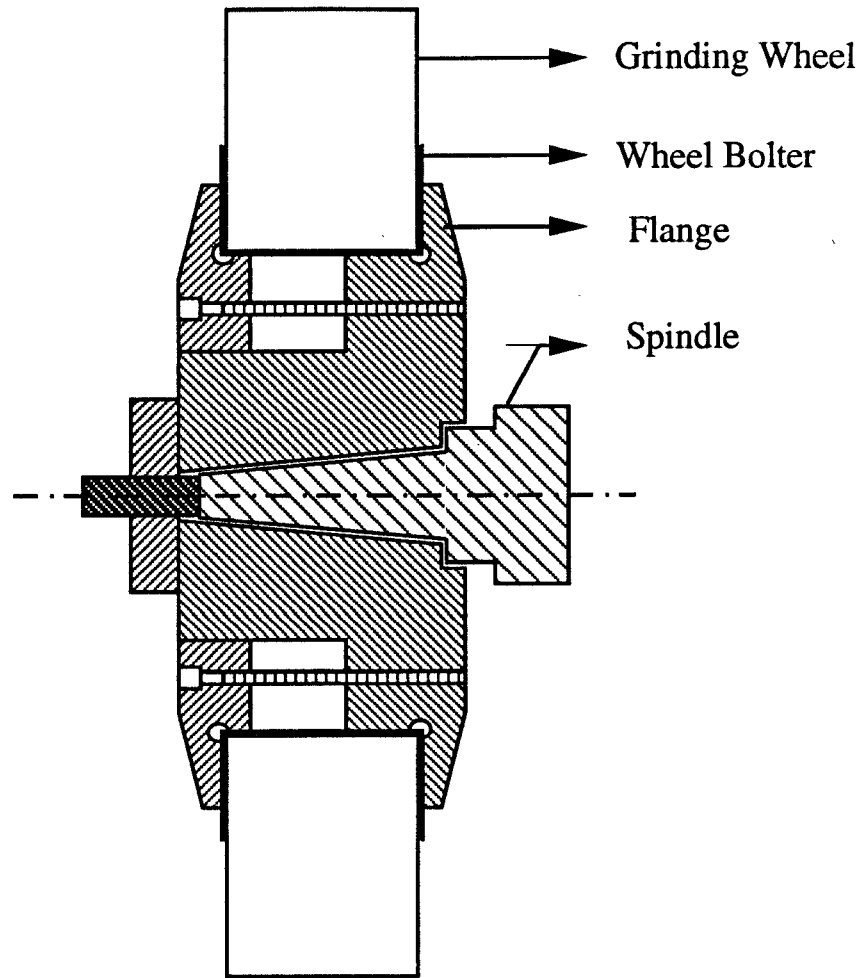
Sectional View of a Tapered Grinder Spindle
